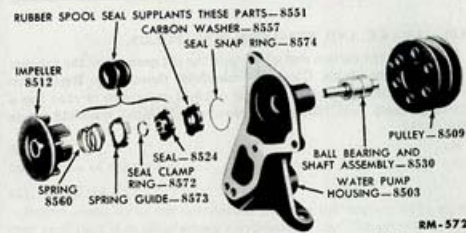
Water Pump (Ball Bearing Type), Disassembled
